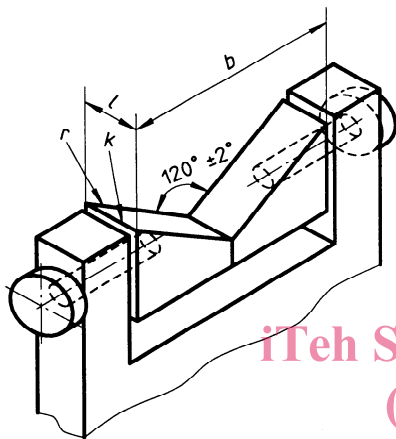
Schematic drawing of prism support (ISO 11093-6:1996)
